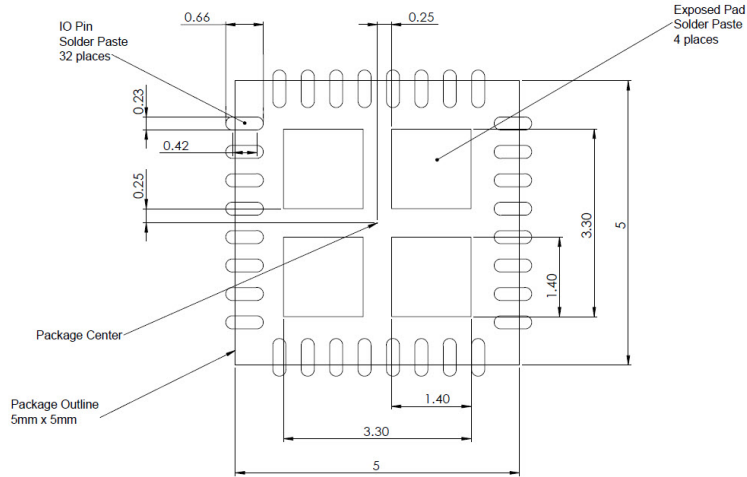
• PD69210 Top-Layer Solder Paste and Vias PCB Layout for Thermal Pad Array
